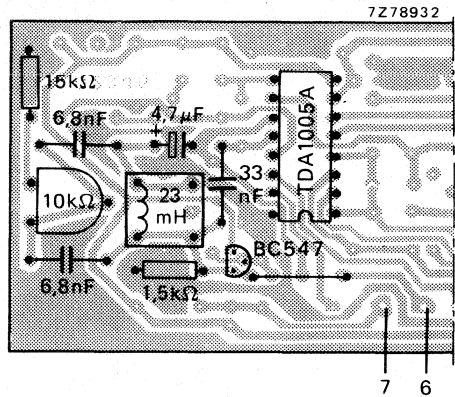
Printed-circuit board component side, showing component layout of Fig. 19.
